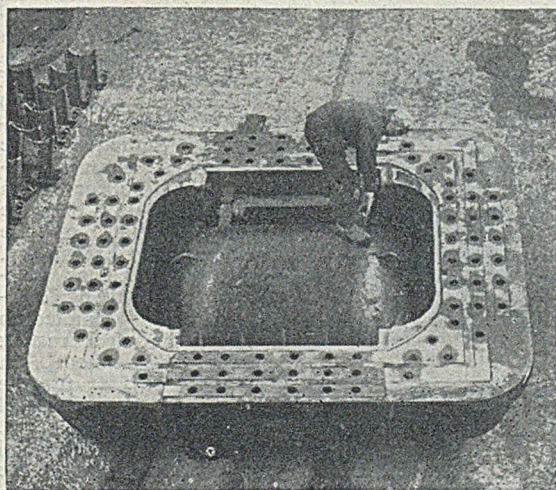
Steel Sealing-door Assembly for use in a Coal Mine, size 4 ft. 7 in. by 6 ft. 6 in. and designed to withstand 1,300 ft. head of water.
